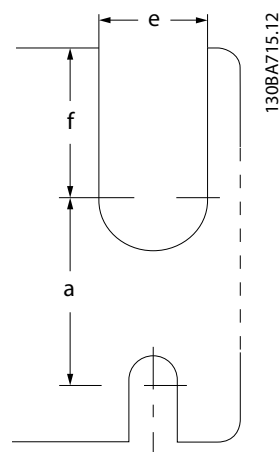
Top and Bottom Mounting Holes (B4, C3, C4)
